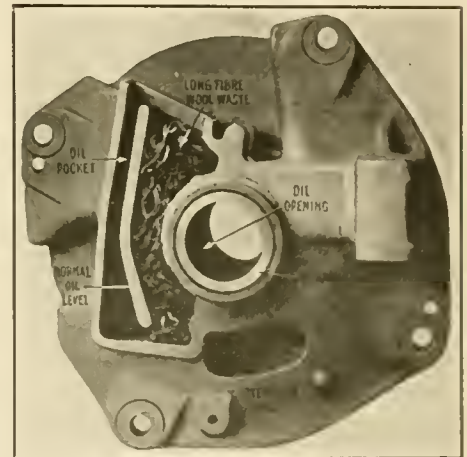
HOUSINGS WITH SECTIONAL ARMATURE BEARING AND OIL WELL.
